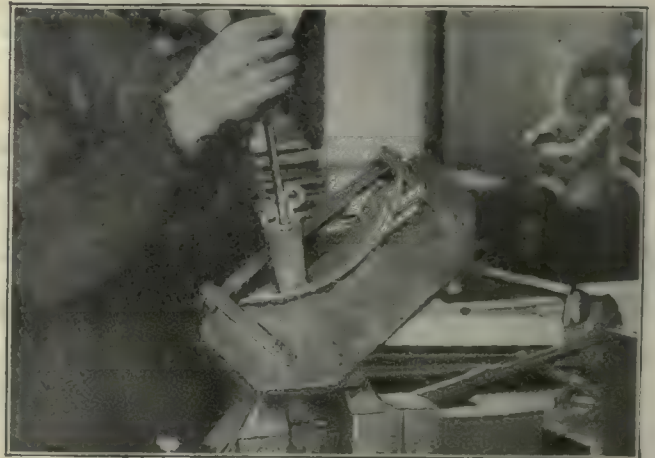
SOLDERING RIBS ON CYLINDER COVERS
